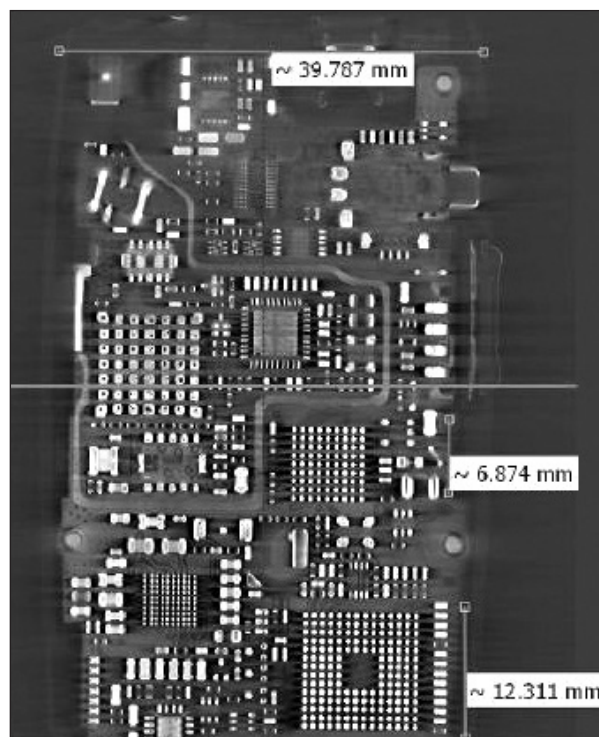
Virtual cross-sectional view of a printed circuit board in a mobile handset.
